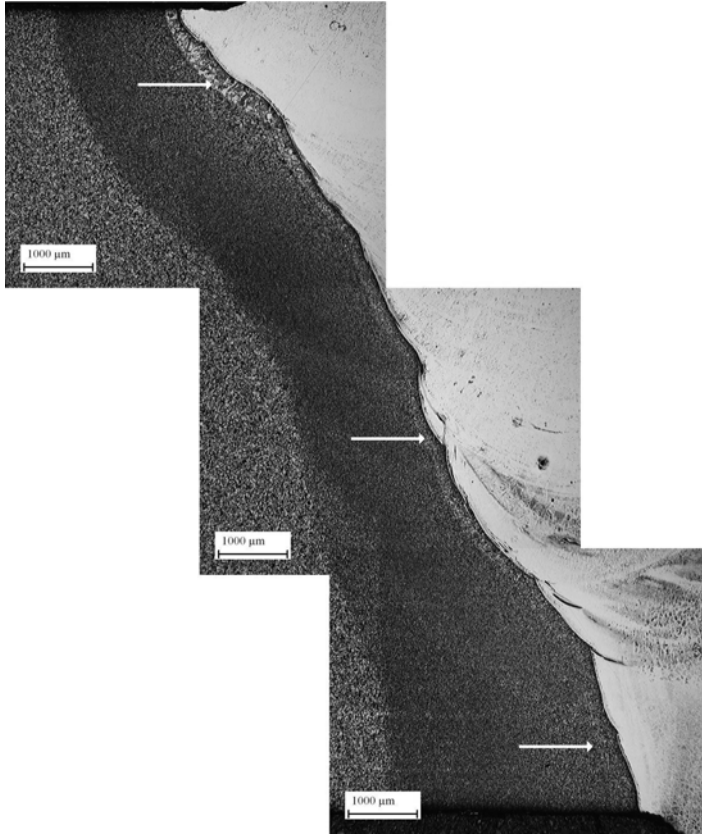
Optical macrograph showing the high temperature heat-affected zone (arrowed) of the multipass weld performed on steel B (etched with Vilella's reagent). 11 passes were employed to complete the weld.
